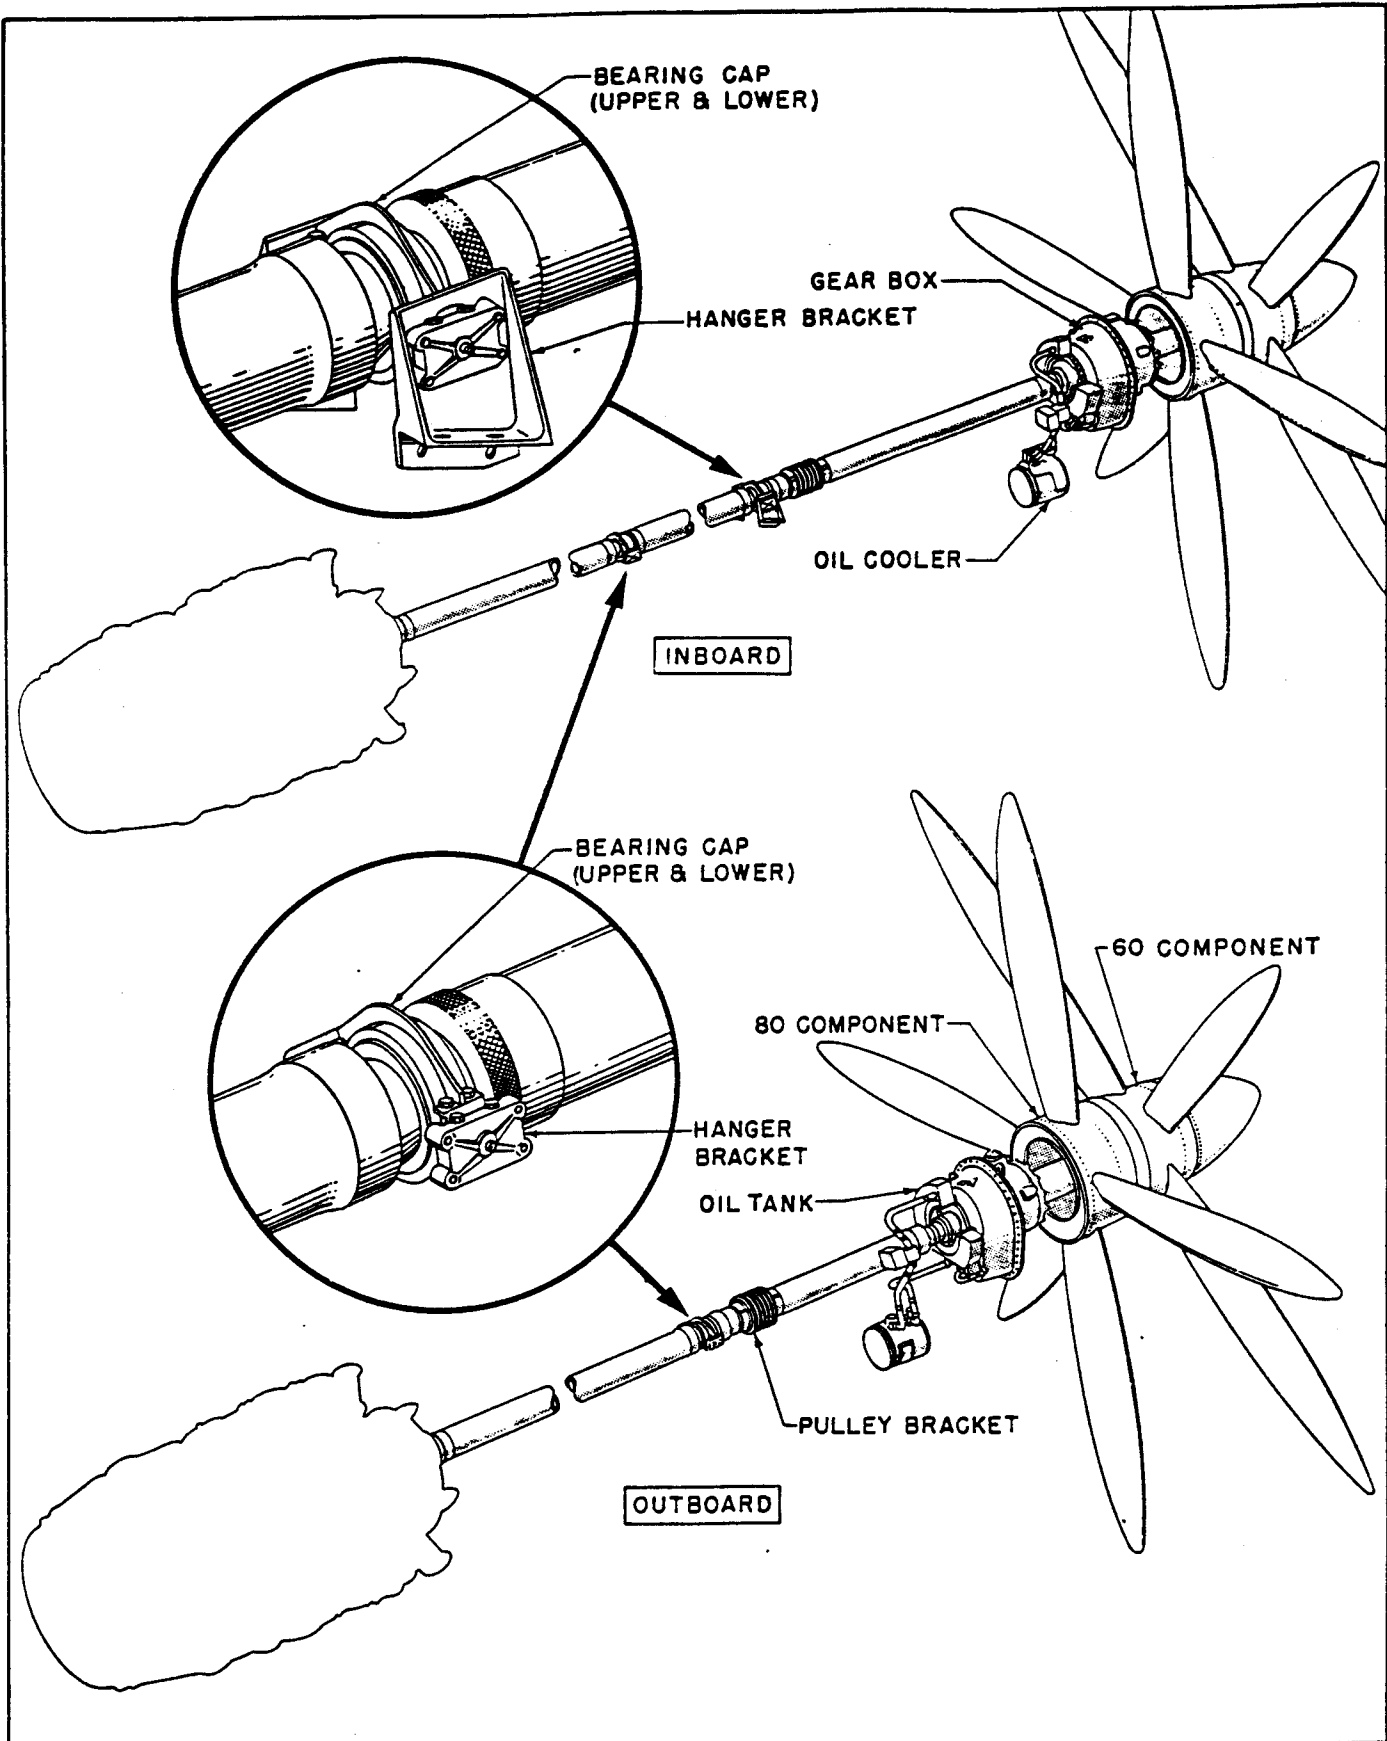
Propeller, Gear Box, and Extension Shaft Assembly
